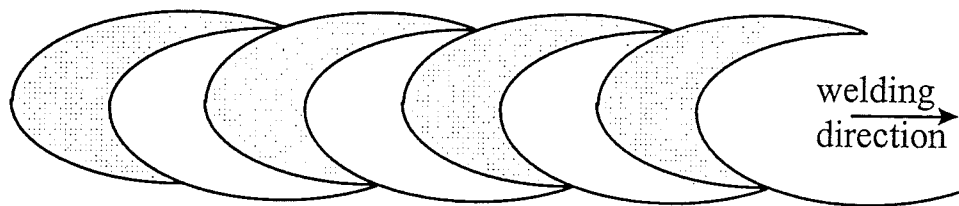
Schematic drawing of weld ripples and weaved fusion boundaries due to alternating stirring (top view).
